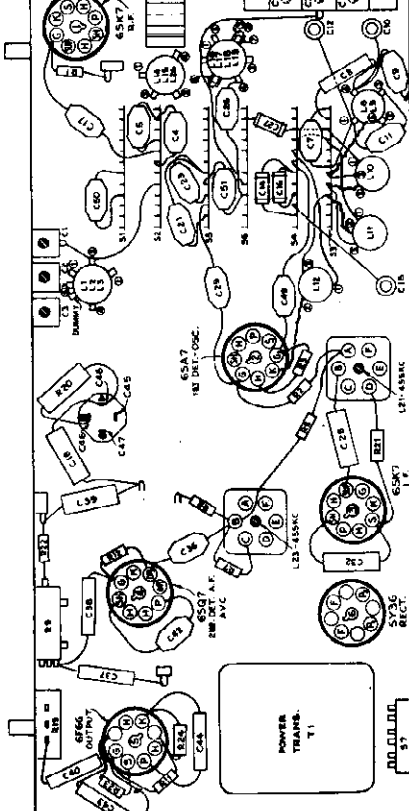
TUBE, TRIMMER AND PARTS LOCATION—BOTTOM VIEW
